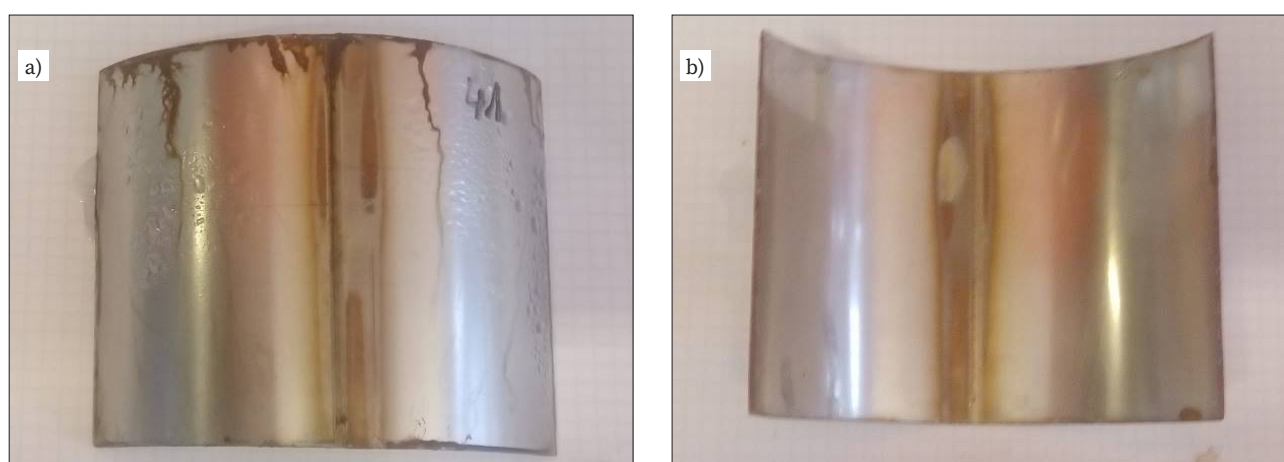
Surface of the laser beam welded joint (LW) after 168 hours of the test in the salt spray chamber: a) weld face and b) weld root
